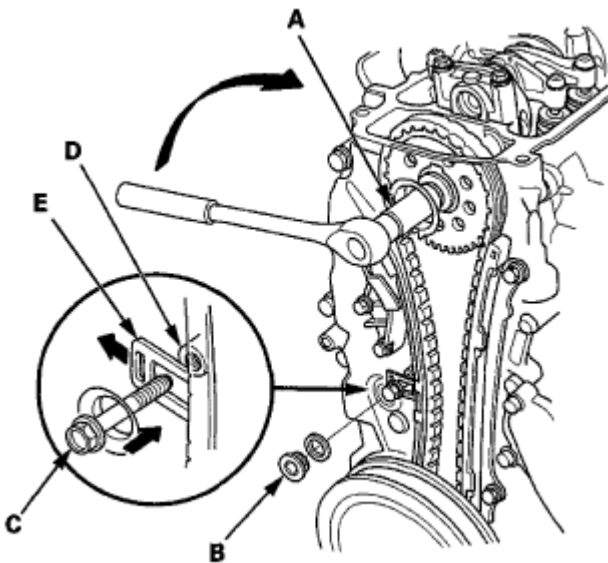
Setting Socket Wrench On Camshaft Sprocket Bolt
